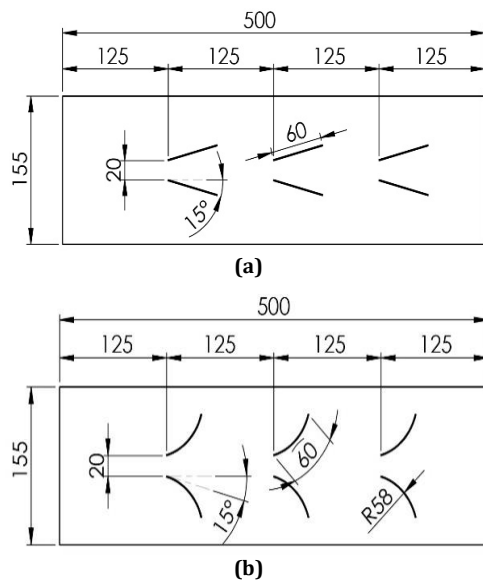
Test plate top view showing (a) RWVGs; (b) CRWVGs
